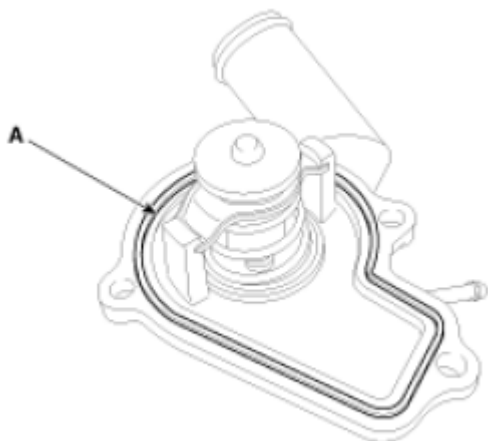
Identifying O-Ring Of Water Temperature Control Assembly
